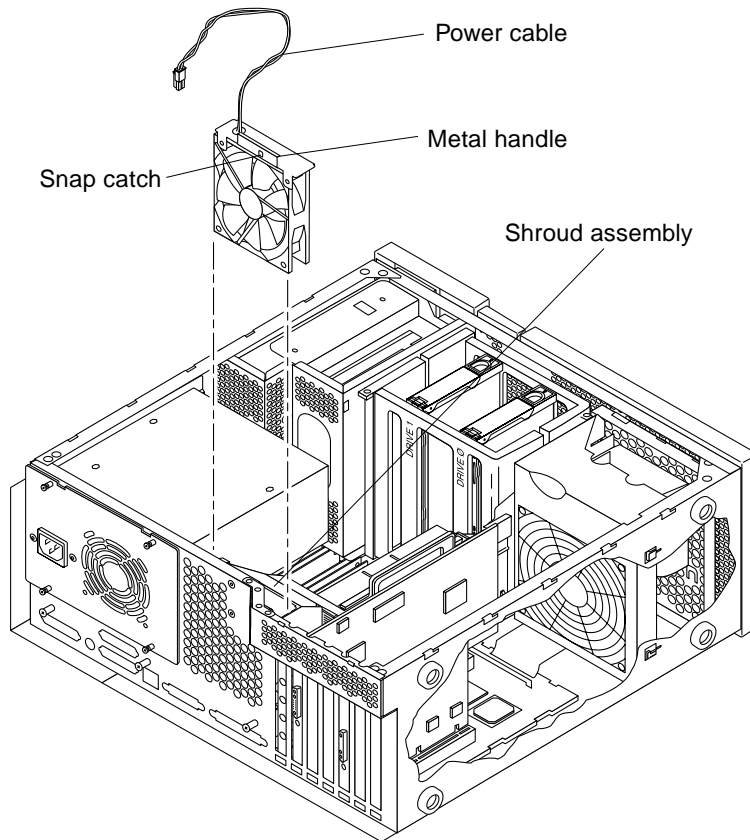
Removing and Replacing the Two-Piece Shroud Fan Assembly
